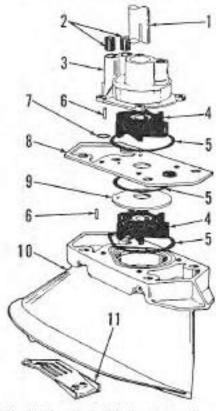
Exploded view of pump housing and associated parts used on Floor Scott models. On Fishing Scott, pumps are located in lower unit gearcase.
